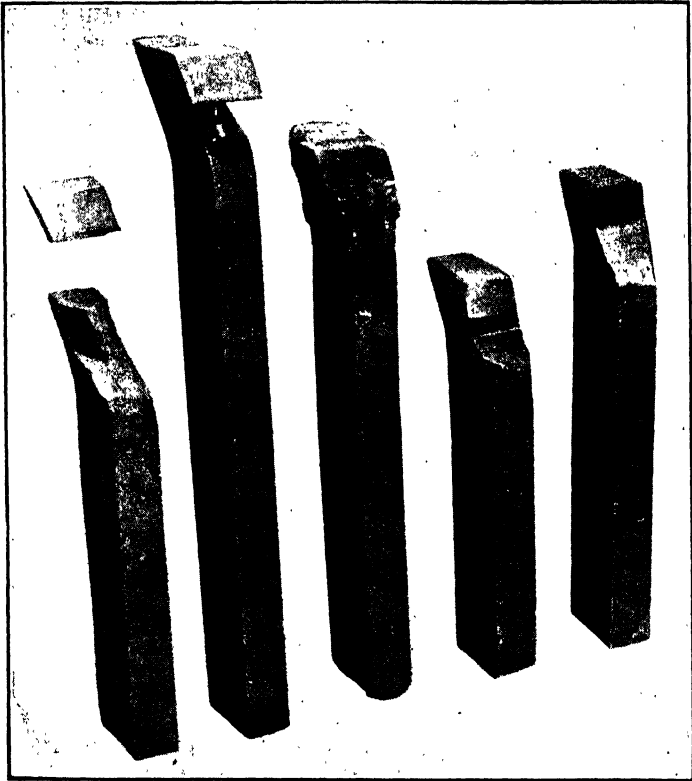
HIGH-SPEED MACHINE TOOL TIPS WELDED ON TO IRON SHANKS.
